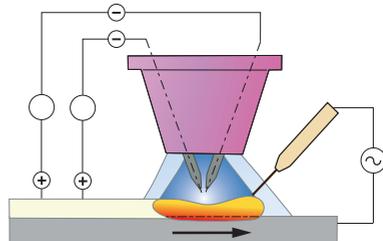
Welding configuration using TIG^{er} technology. The TIG electrodes and wire each have a separate current source but the Hot Wire source is an AC source to prevent instability caused by interactions with the welding arc.
